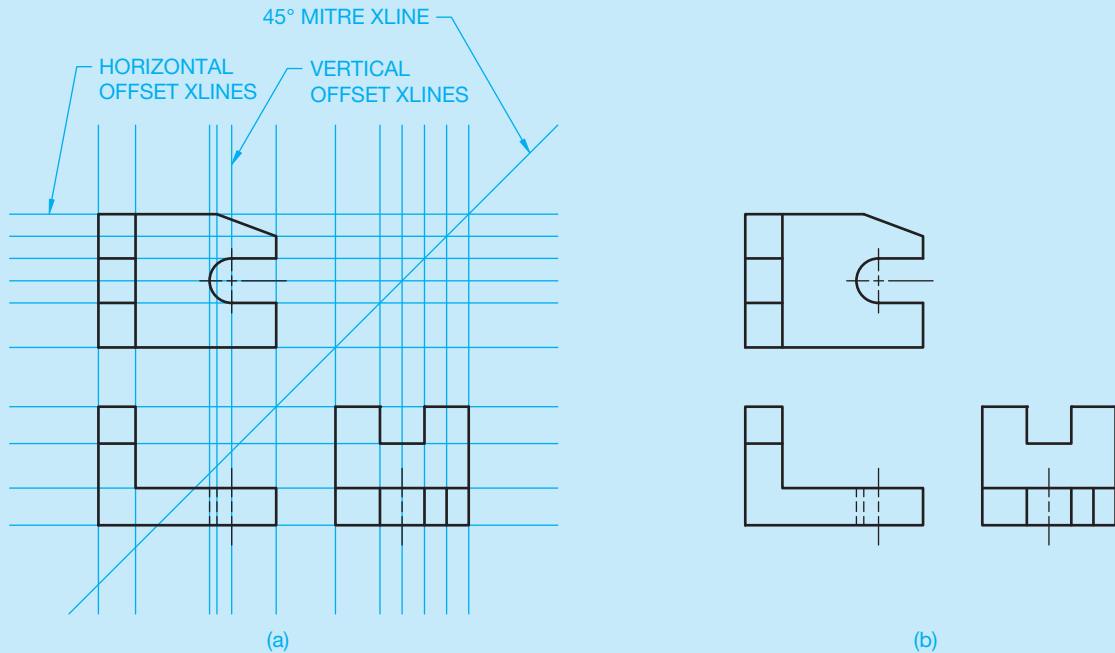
(a) Using a complete grid of construction lines to form a multiview drawing by locating points at the intersections of the construction lines. (b) The multiview drawing with the Construction layer turned off.
